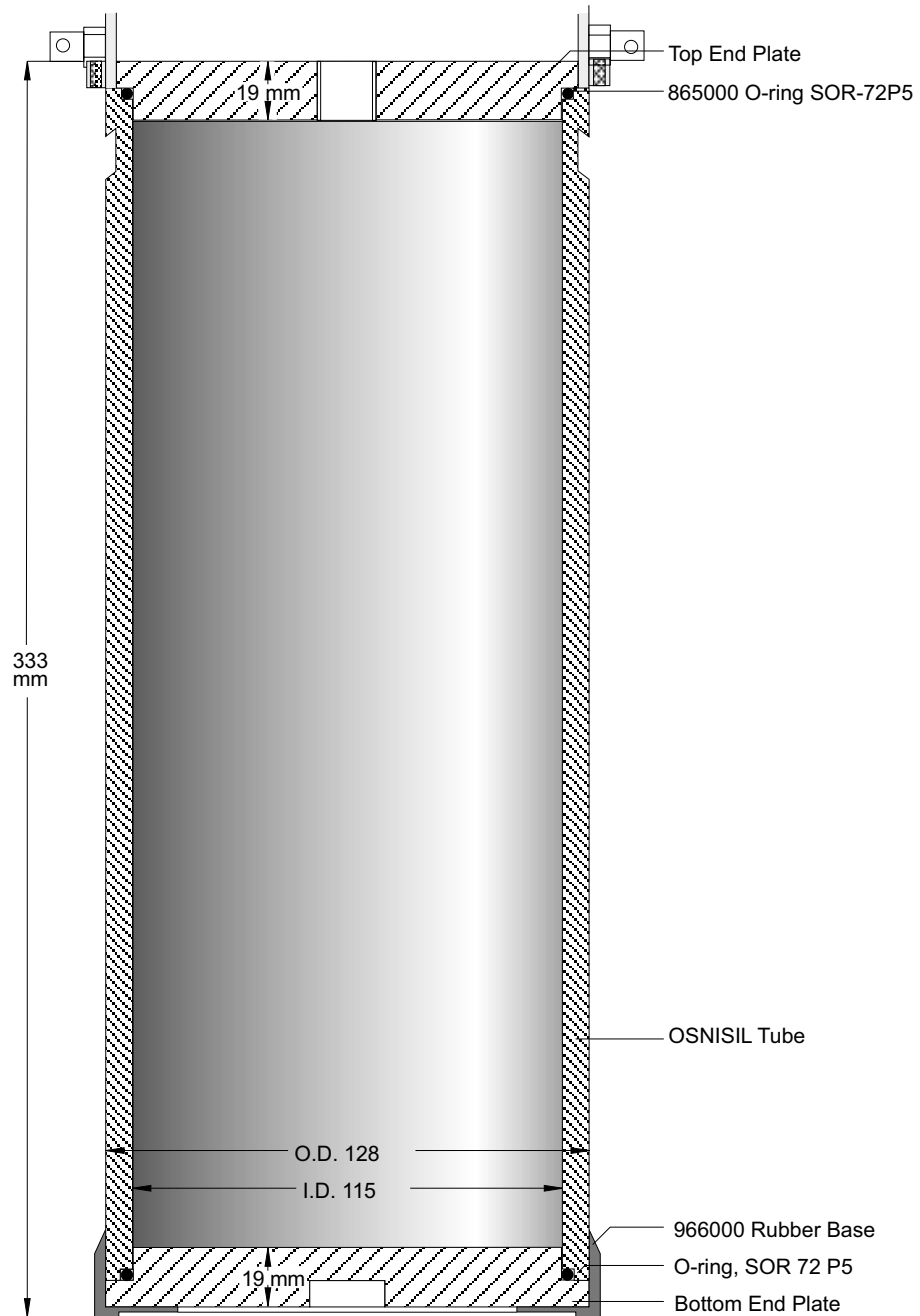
Pressure Case 1171B with Top End Plate installed
